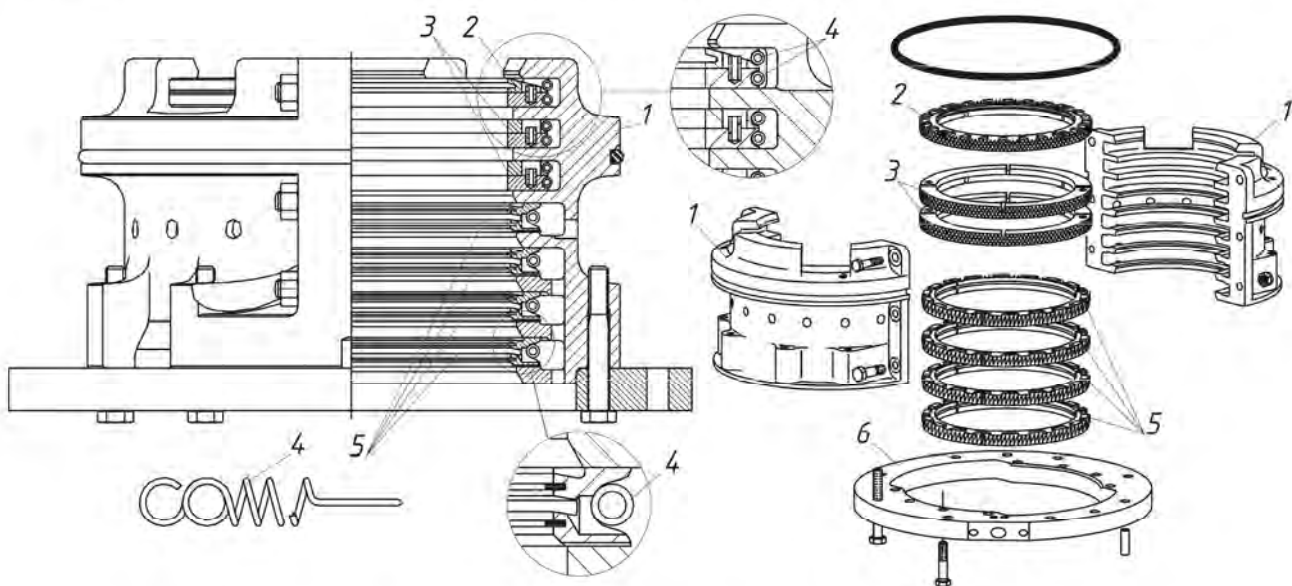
Piston rod oil seal of MAN K, L, S, G series engines. 1 – gland housing; 2 – upper oil ring; 3 – sealing rings; 4 – coupling springs; 5 – lower oil rings; 6 – base of the gland housing (adapted from [21])
